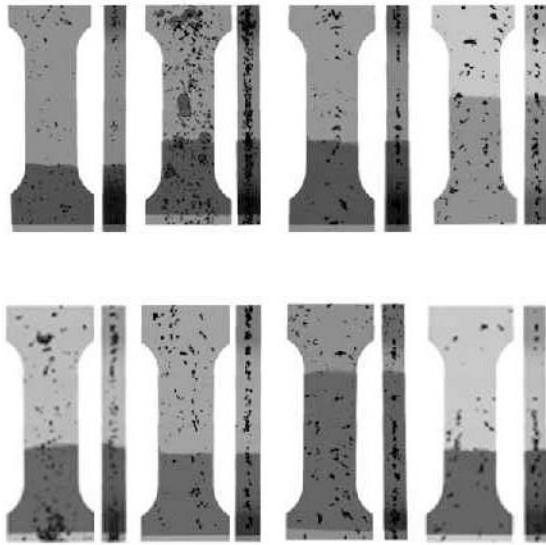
Results of fracture surface detection and relation between distribution of casting defects and fracture surface.
